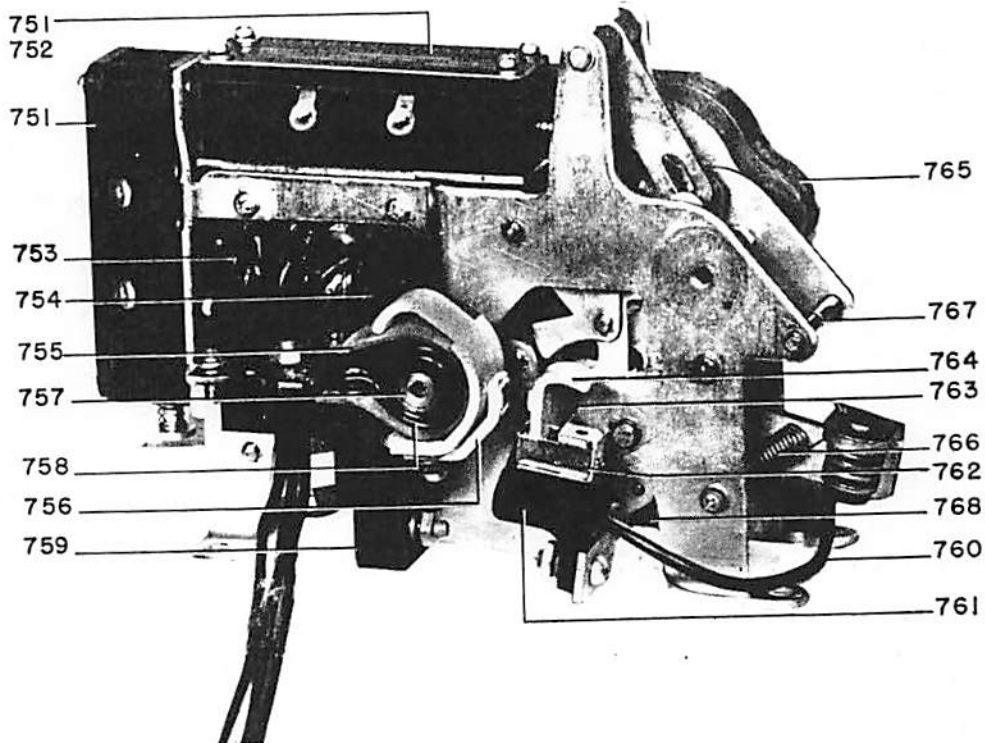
Control Device for all Mechanisms (Ref. 750)
